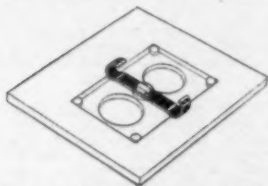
The spring steel latch clip is firmly located on the integral stud of the moulded take-out plate by simple pressure.
